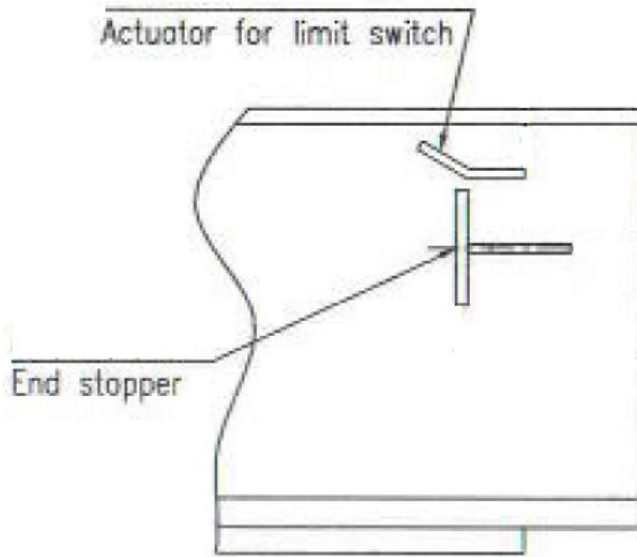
Diagram of the starboard end of the aft side of the fixed monorail showing the position of the bracket for engaging the limit switch and the stopper.
